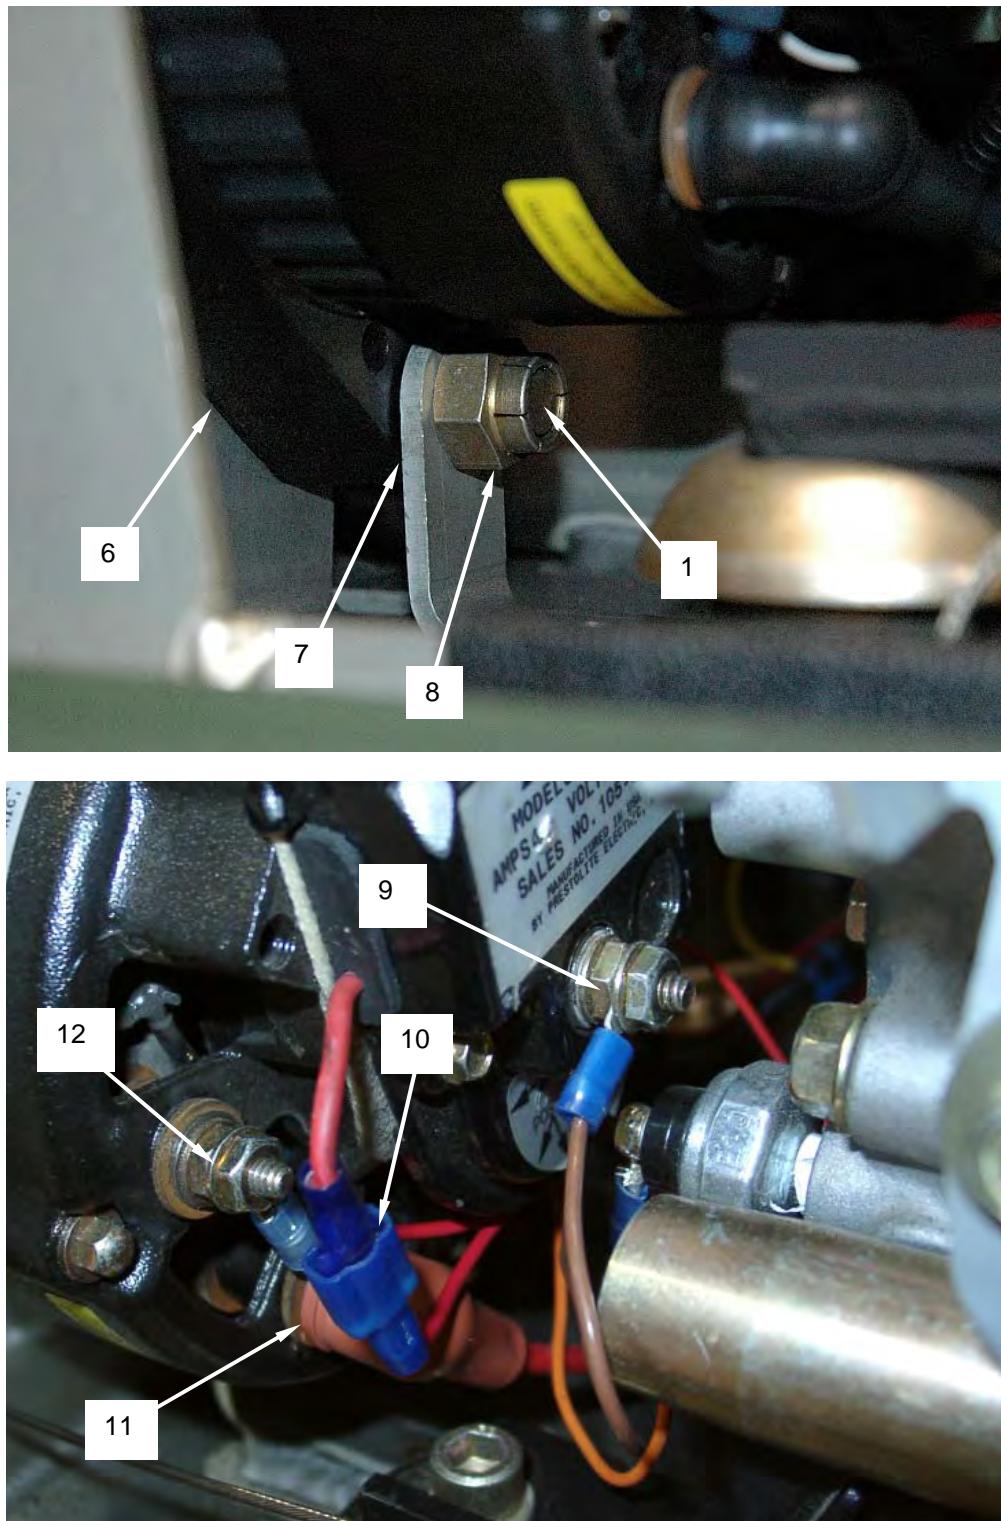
Adjust and Replace 24V Alternator Assembly and Drive Belt (Sheet 2 of 3).
